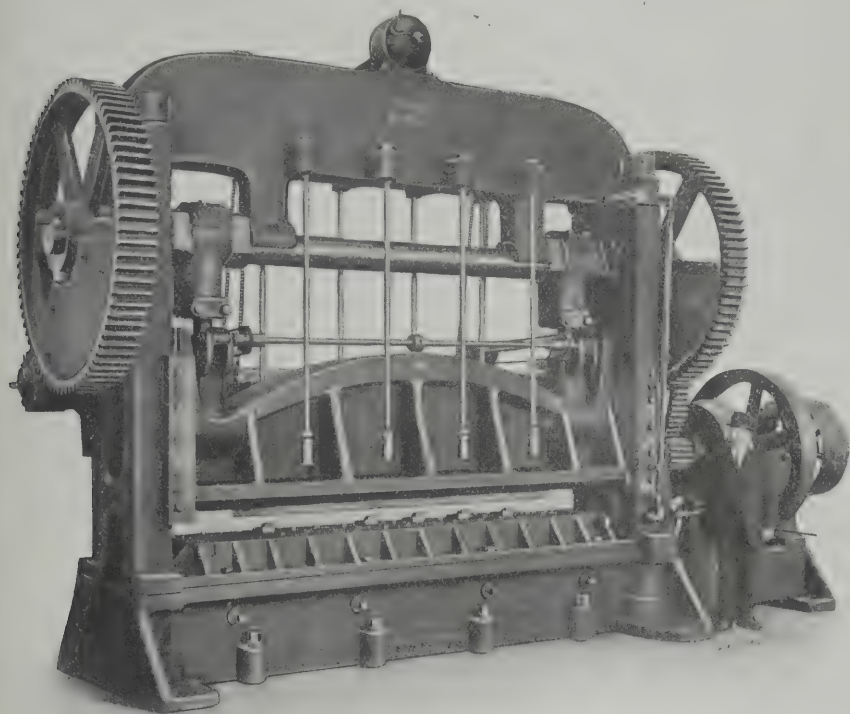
Large Press for Automobile Frame Work, built by the Toledo Machine & Tool Co., Toledo, O.
